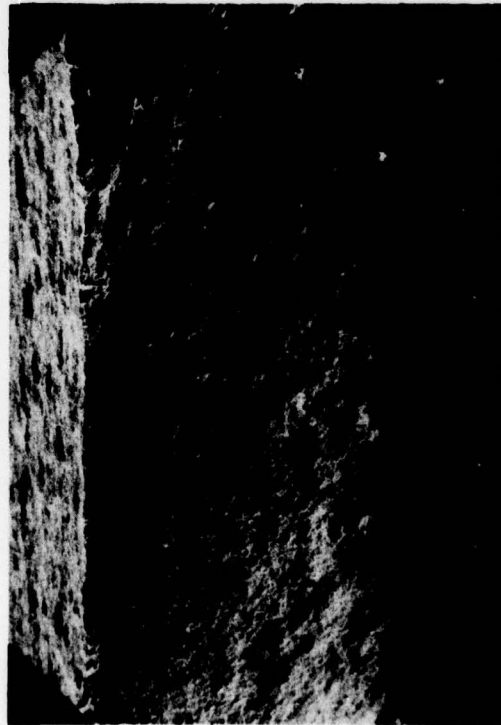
Fracture Surfaces of NC-203A HPSiC Specimen No. 6 (Typical Sound Material With Light Grinding Damage).
